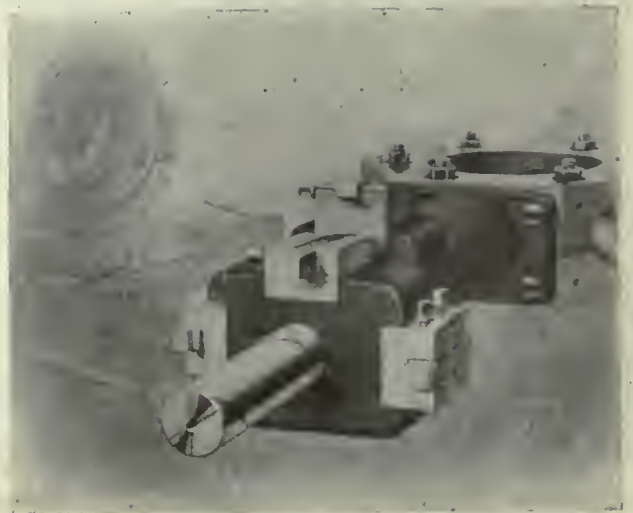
THE SPECIAL MULTIPLE CUTTER BORING HEAD USED AT THE FIRST OPERATION
